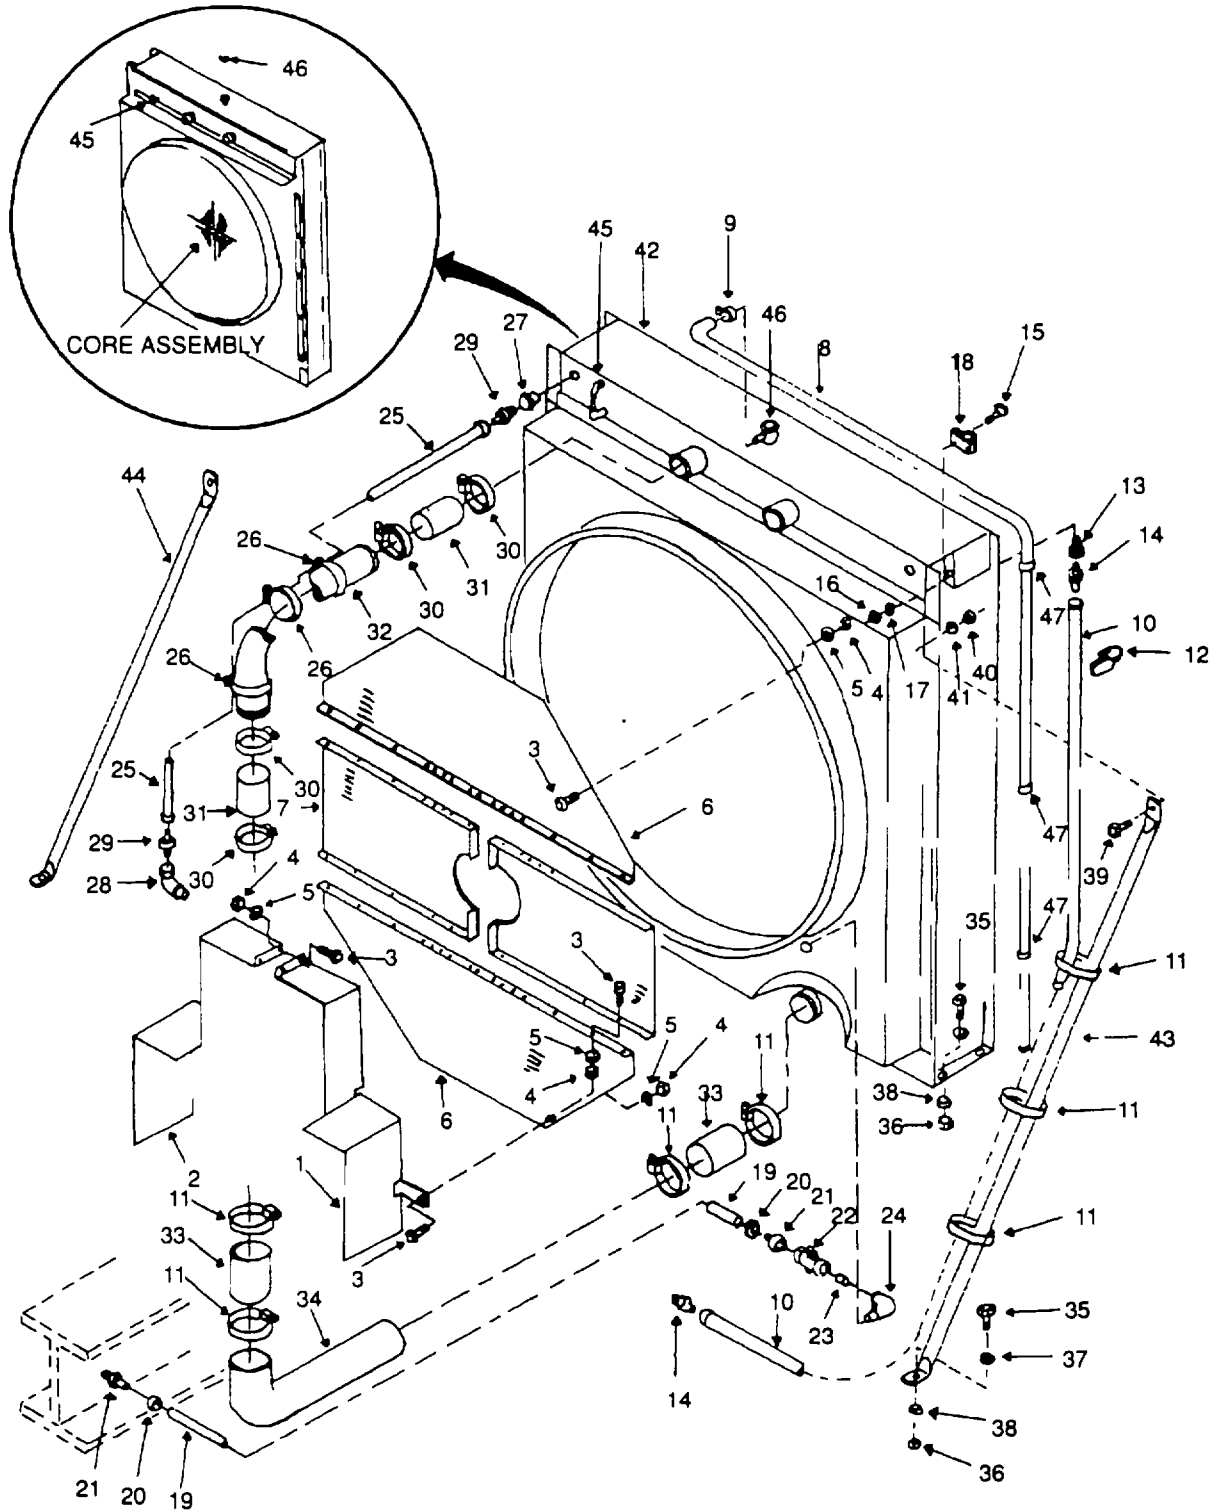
Radiator Assembly and Related Parts (Sheet 1 of 2)
